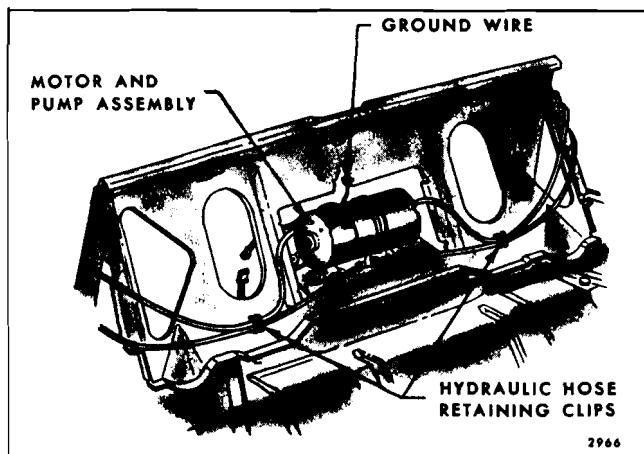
Motor and Pump Installation "A" Styles Shown
